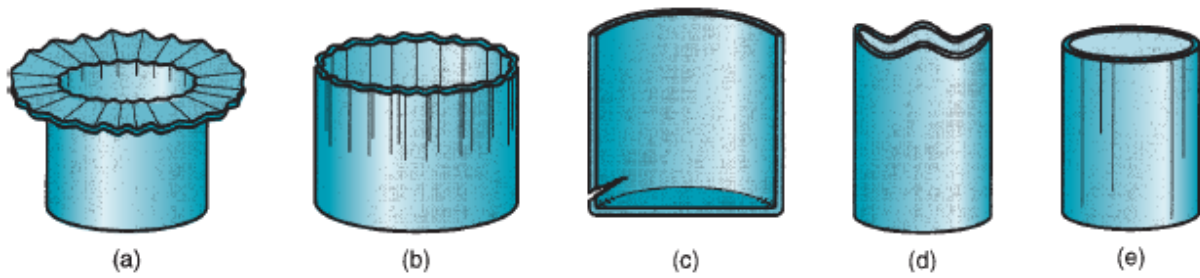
Common defects of drawn parts: (a) flange wrinkling, (b) wall wrinkling, (c) tearing, (d) earing, and (d) surface scratches (Groover, 2012)
